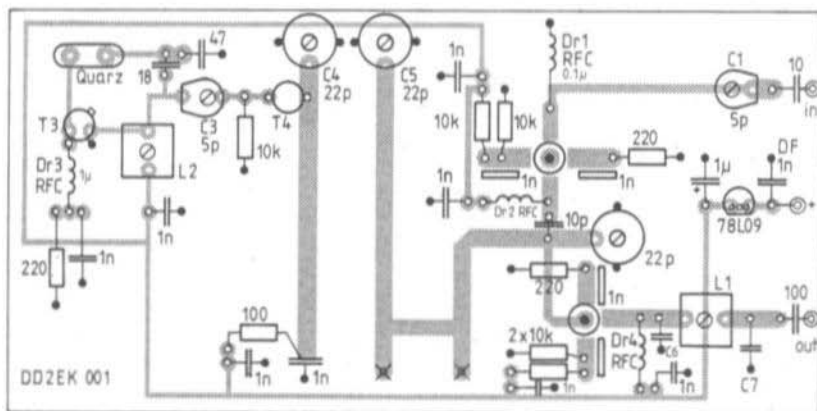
The printed circuit board (PCB) has a full copper ground plane on the component side
